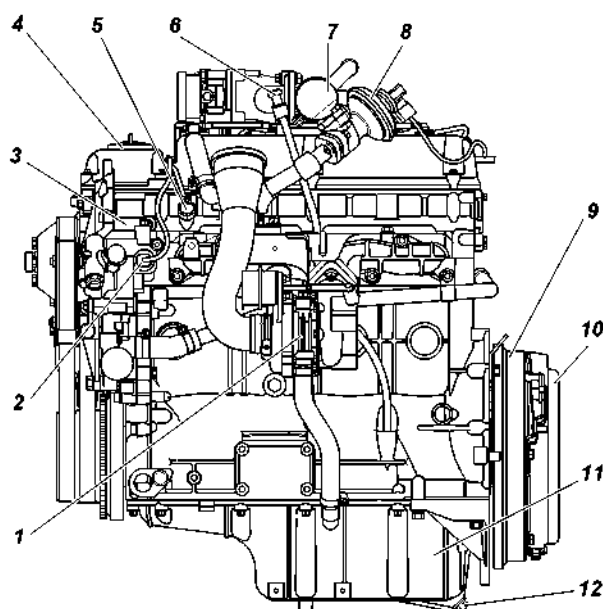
ZMZ-51432 engine (left-side view): 1 - turbo-charger; 2 - coolant indicator of controlling system; 3 - thermostat body; 4 - oil filler lid; 5 - emergency oil pressure sensor; 6 - oil level gauge; 7 - recirculate gases coolant; 8 - EGR valve; 9 - flywheel; 10 - clutch; 11 - oil banjo; 12 - oil drain plug
